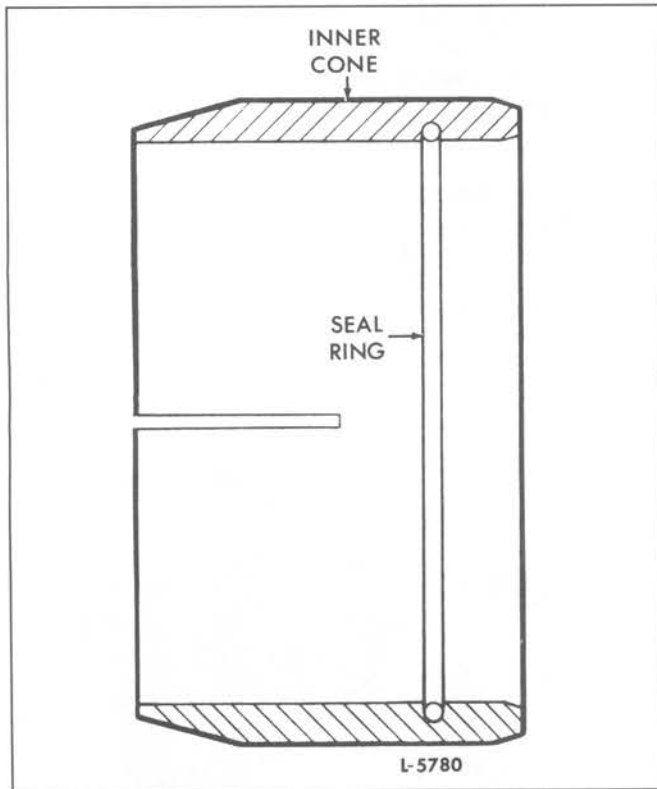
Inner Cone with Seal Ring (8V Engine)
